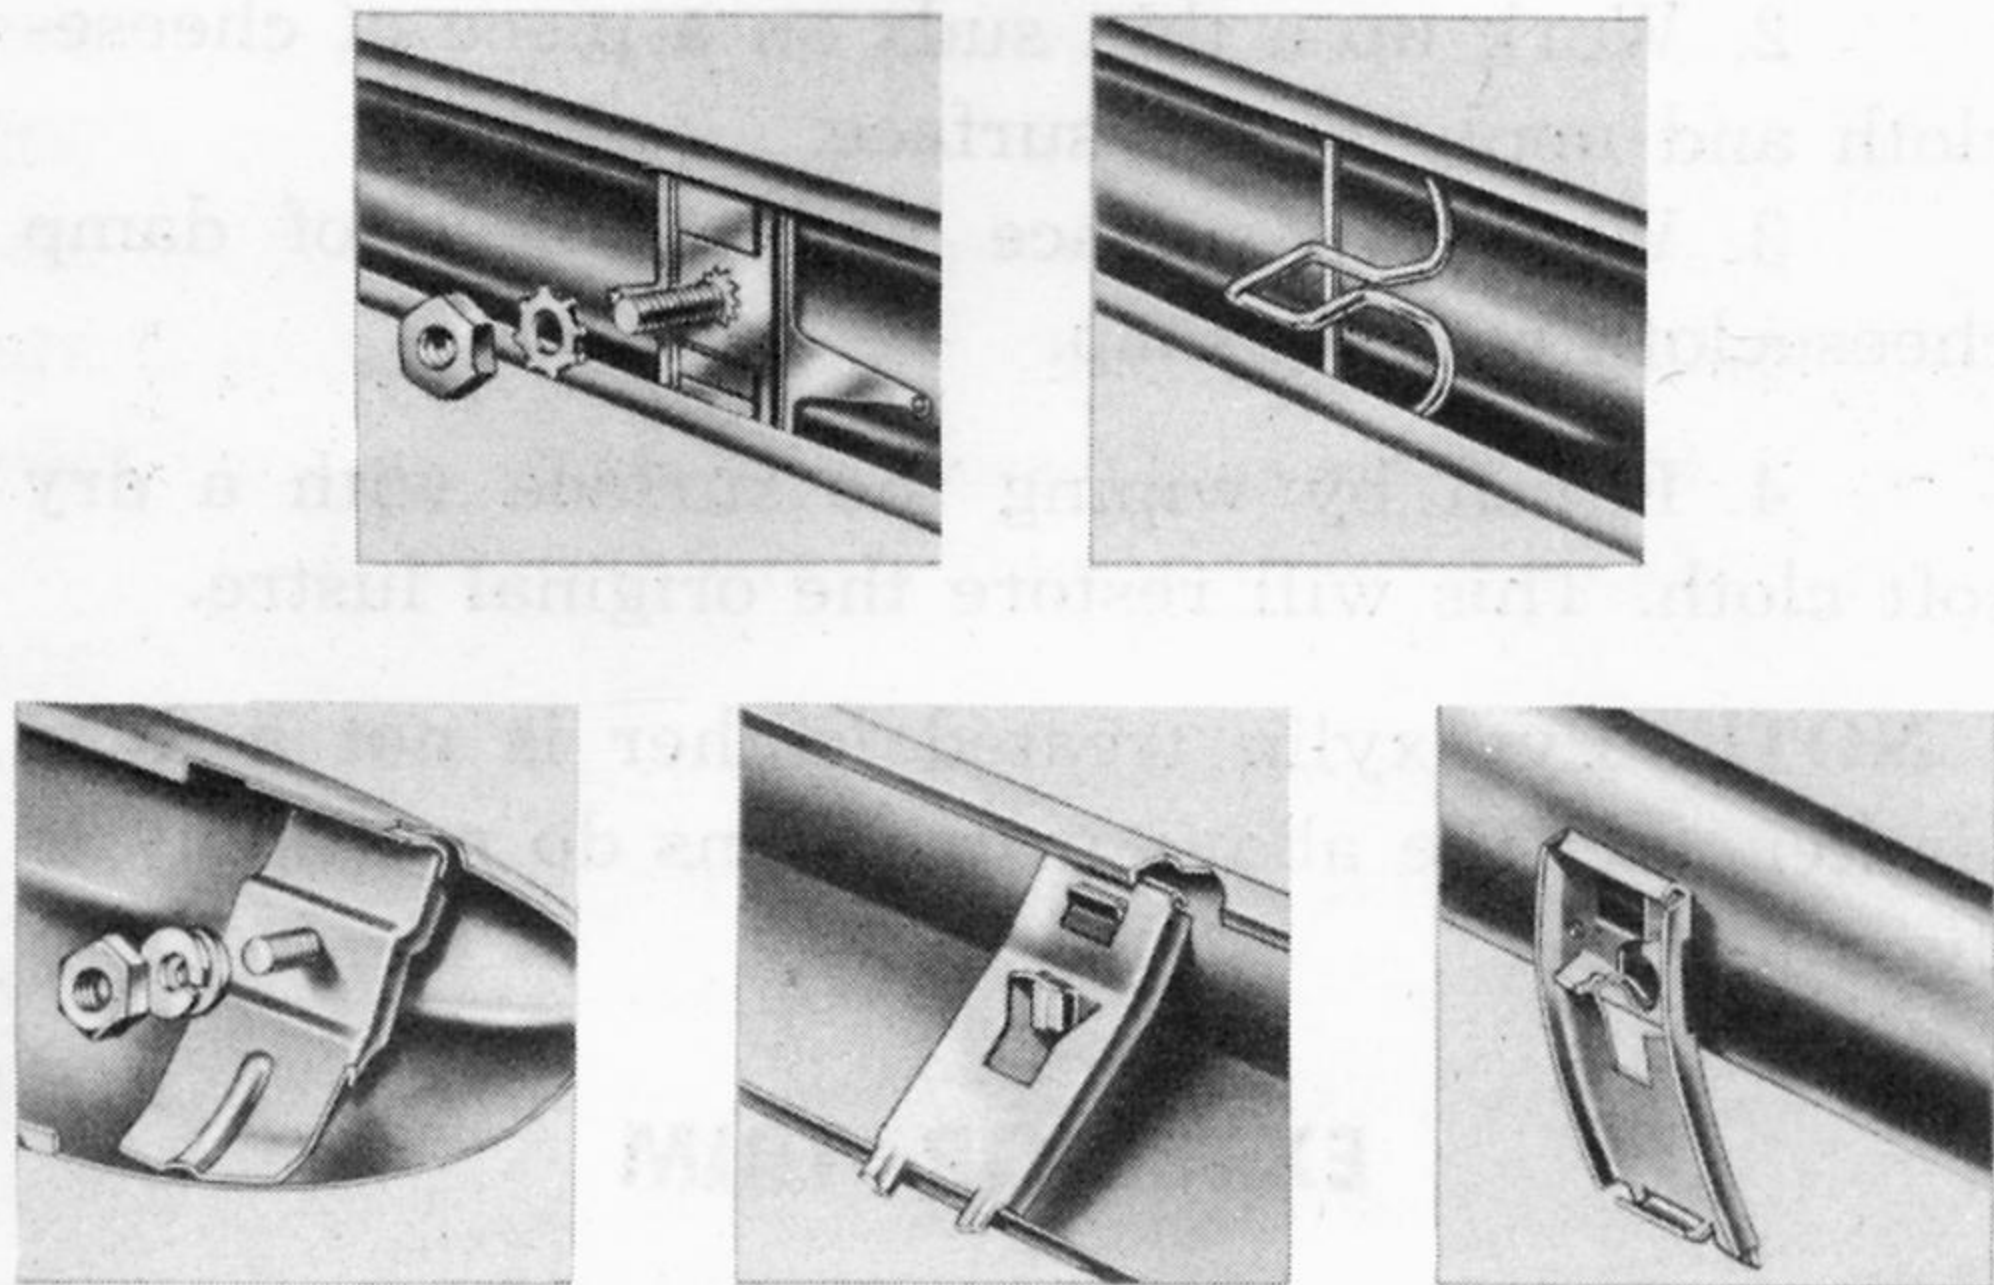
Reveal, Belt and Rub Rail Mouldings—Kaiser
